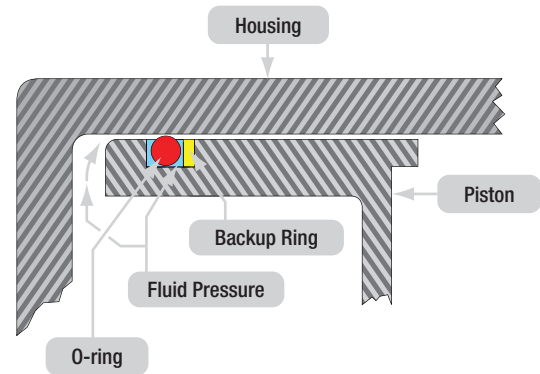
Back-up rings are used to keep O-rings from extruding into the space between the piston and the cylinder. They are positioned on the side of the O-ring away from the fluid pressure.
